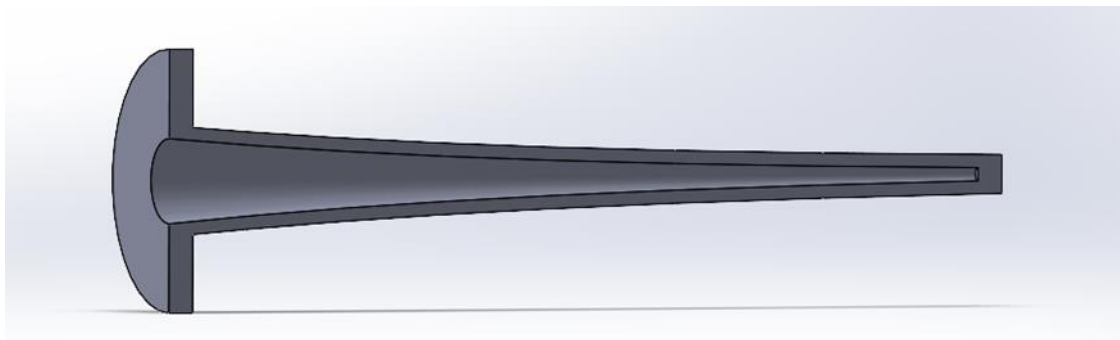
Drawing with dimensions of the conical-rough cavity
